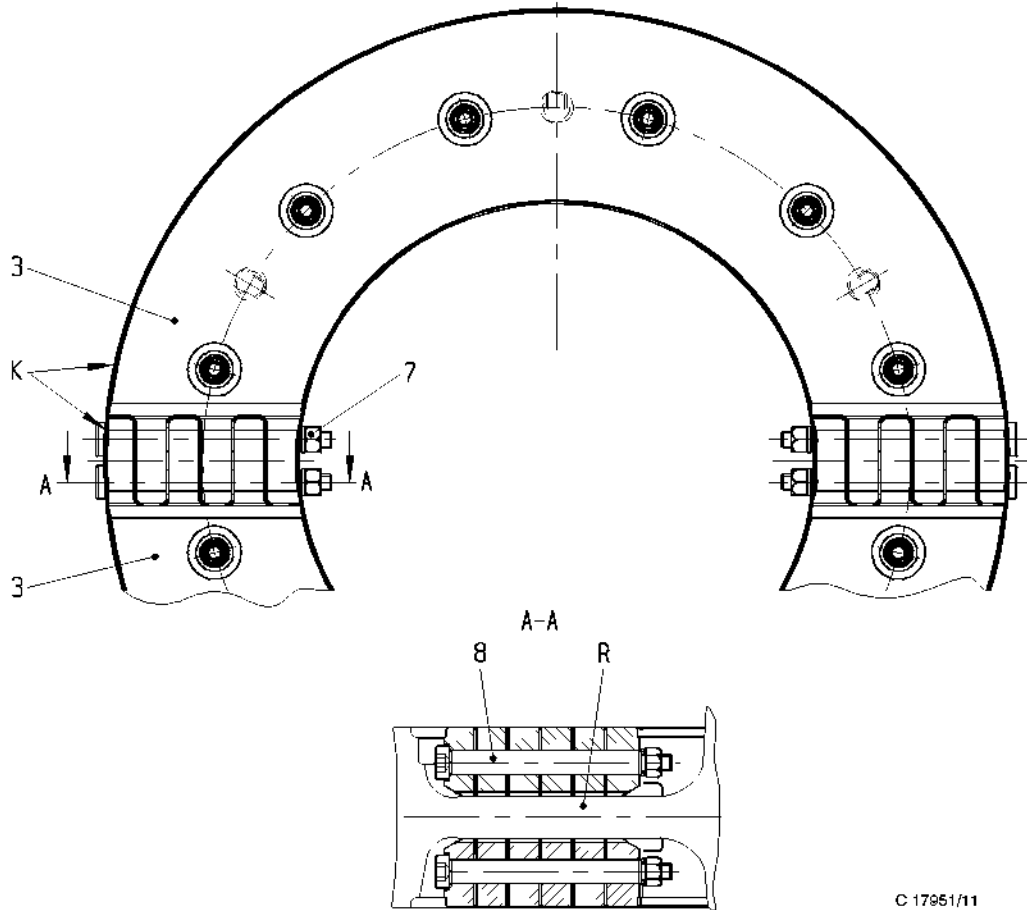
Wheel-mounted brake disc with 12 bolted fasteners
